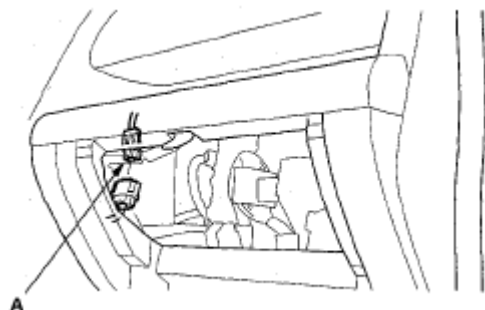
Identifying Front Passenger's Airbag 4P Connector
